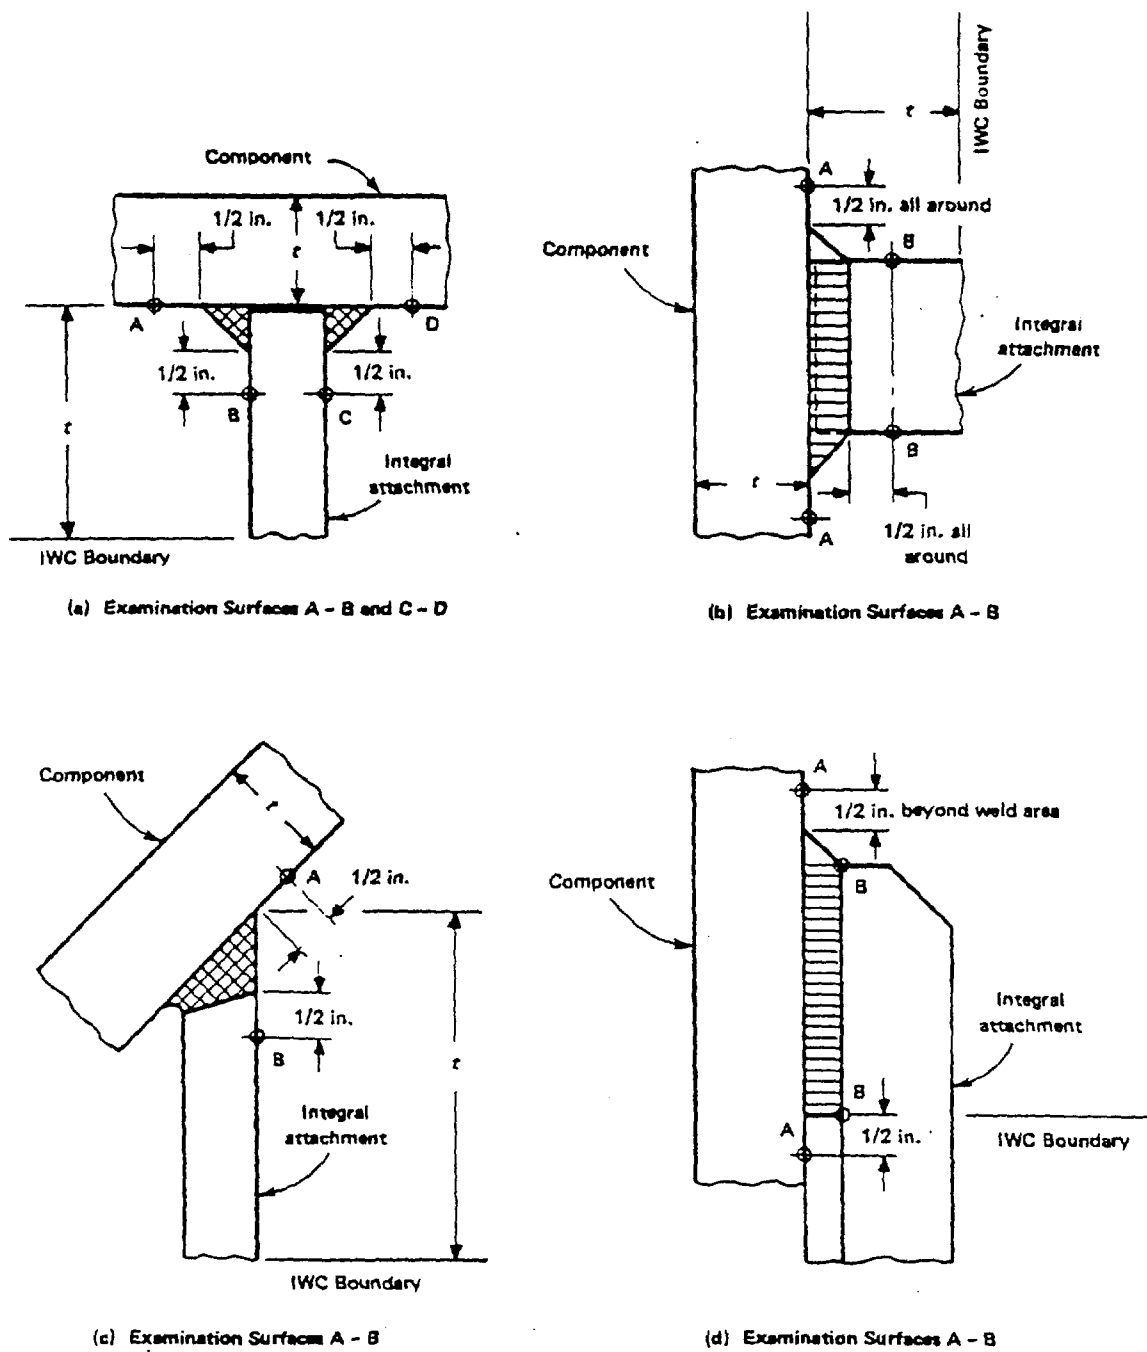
INTEGRALLY WELDED ATTACHMENTS
